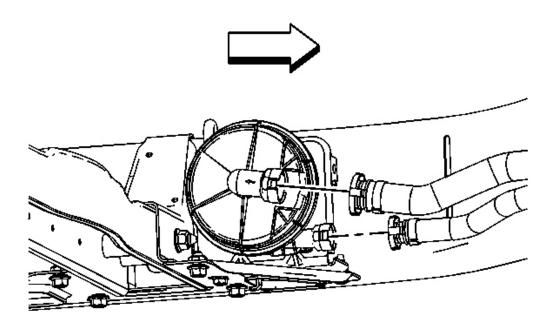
View Of Secondary AIR Pipes & Pump Courtesy of GENERAL MOTORS CORP.
